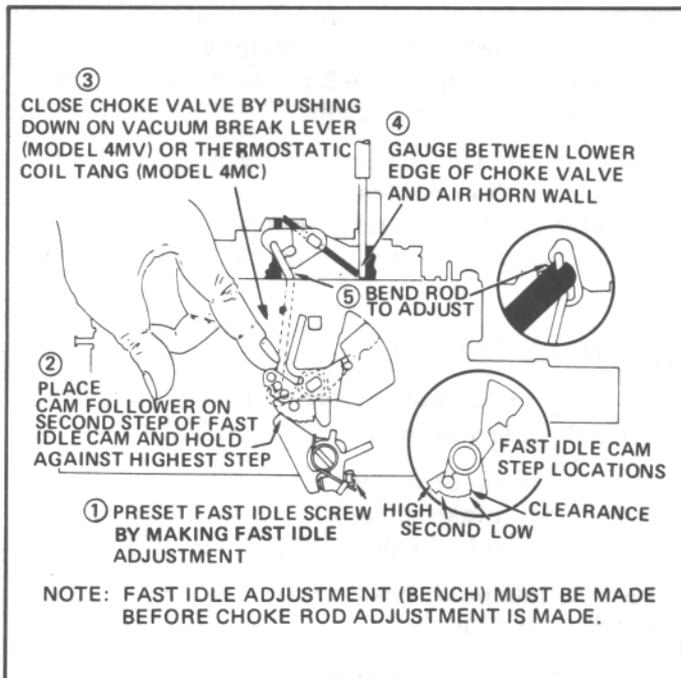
Chock Rod (Fast Idle Cam) Adjustment
